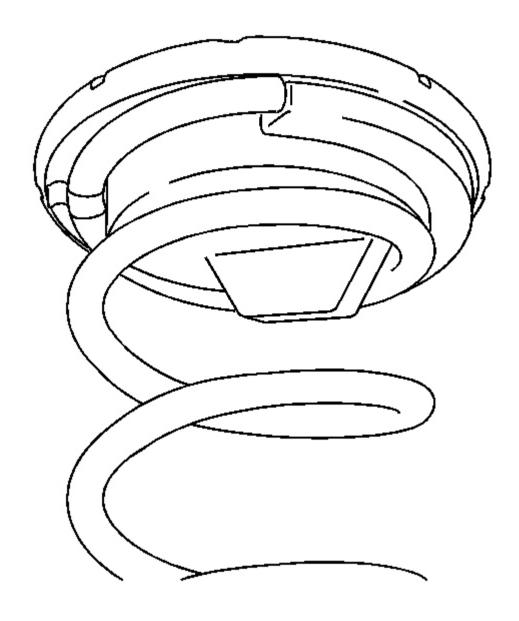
Coil Spring Insulators Courtesy of GENERAL MOTORS CORP.
